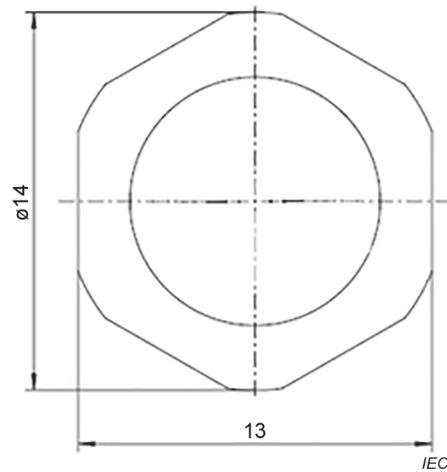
Styles 6J-P8 or 6J-M8, overall dimensions
